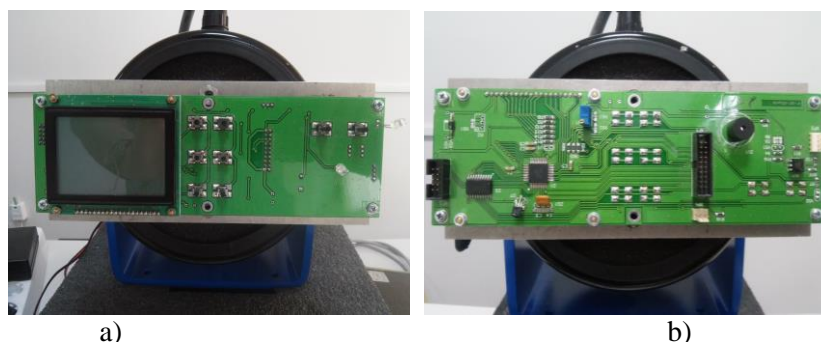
View of the board screwed to the shaker in position 1 (a) and 2 (b)
